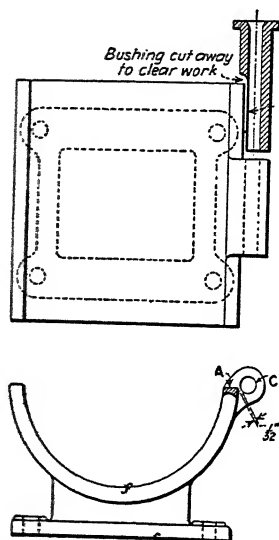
Insufficient Clearance Allowed for Drill Bushing
